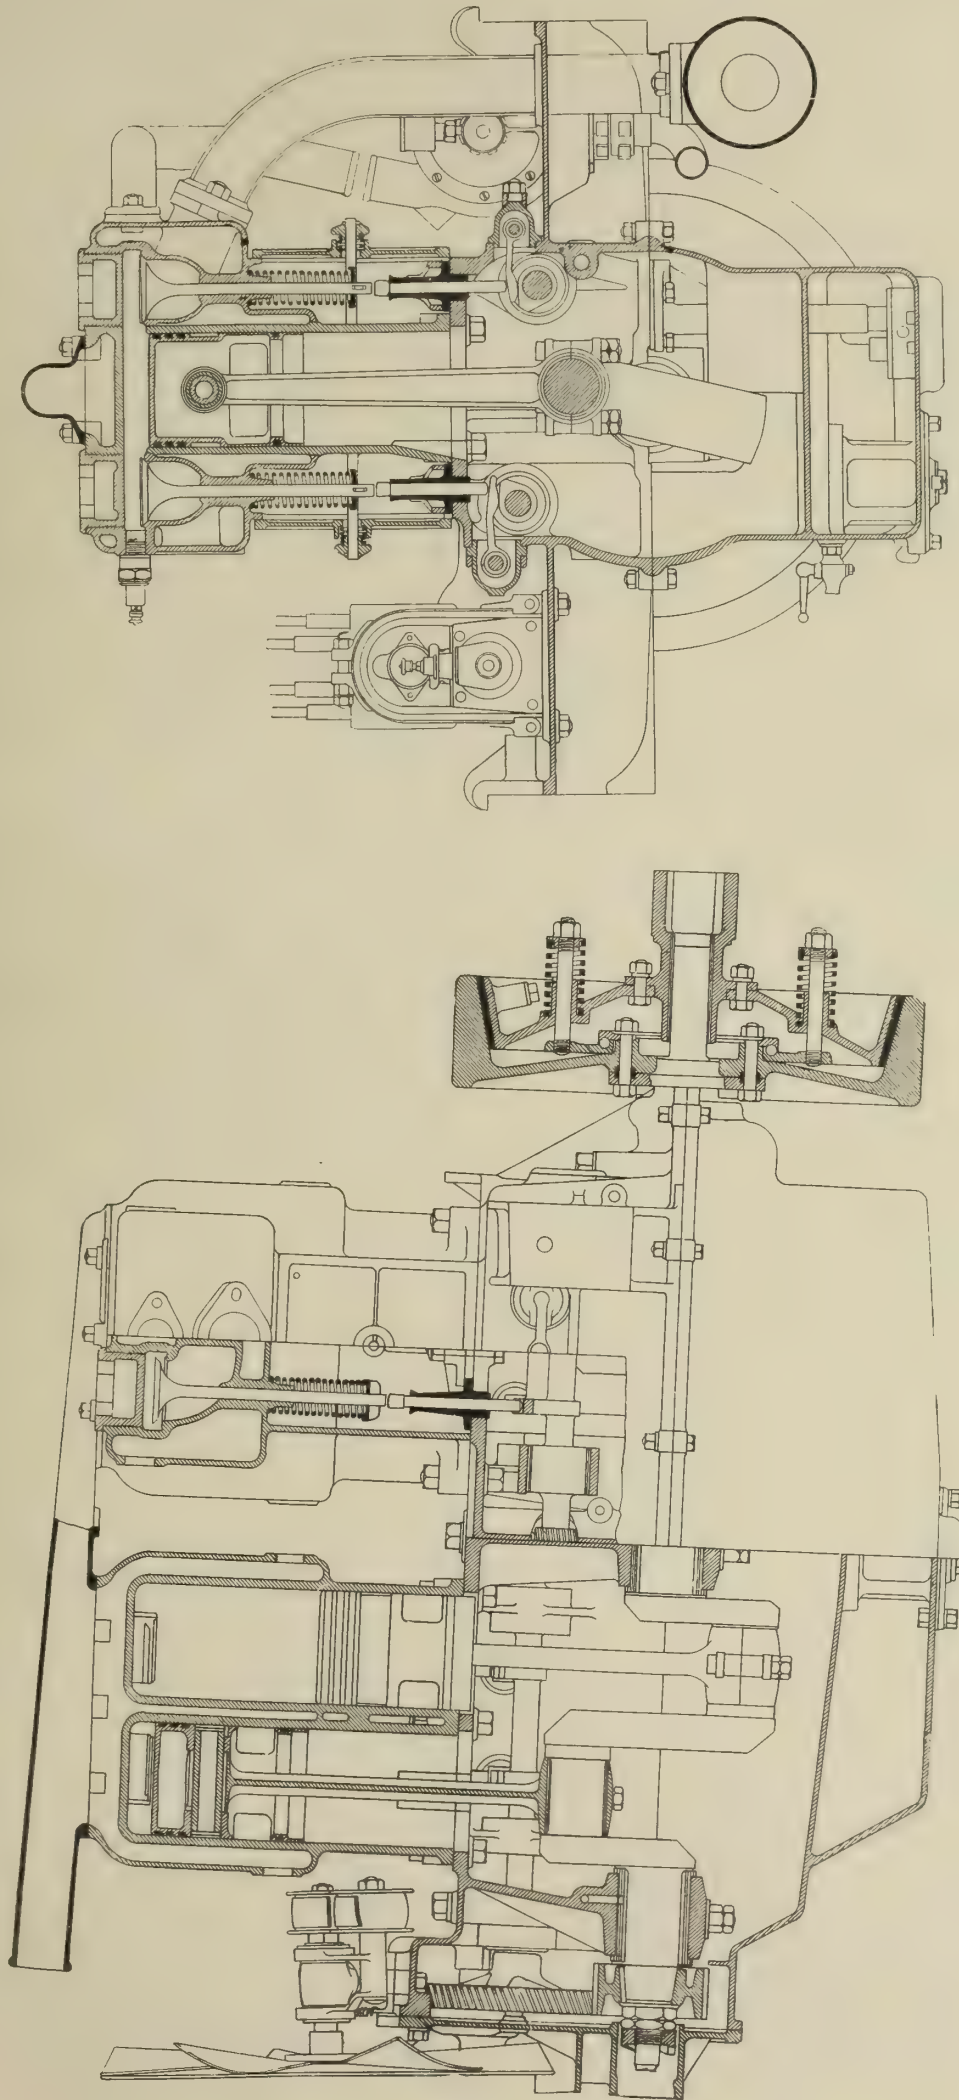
THE 16 H. P. SUNBEAM ENGINE.
